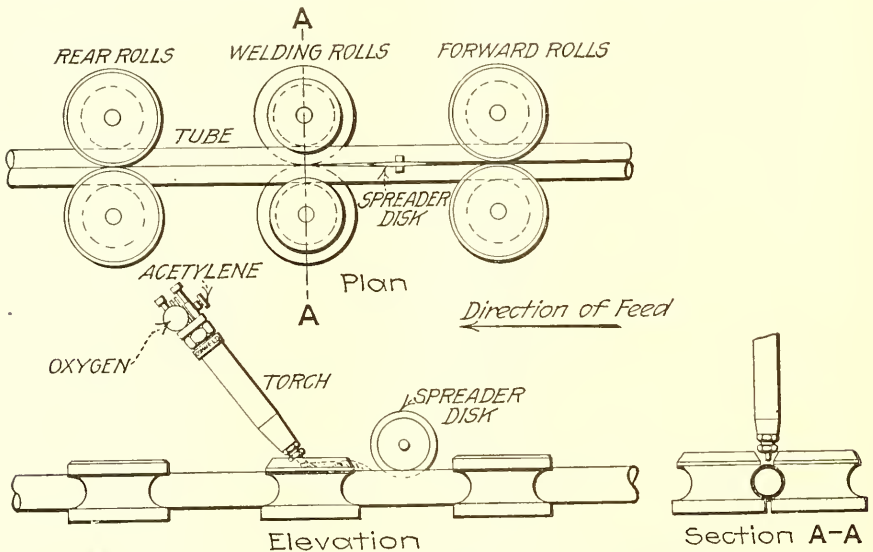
Diagram of Arrangement for Tube Welding.
